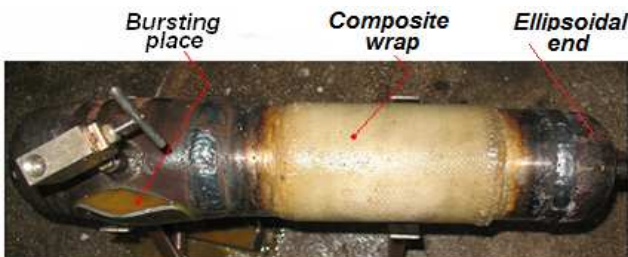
Specimen 1 after testing (burst pressure: 39.5 MPa)
